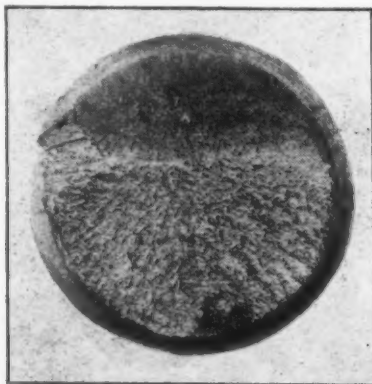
Detail of Progressive Fracture, $\times 0.5$.
